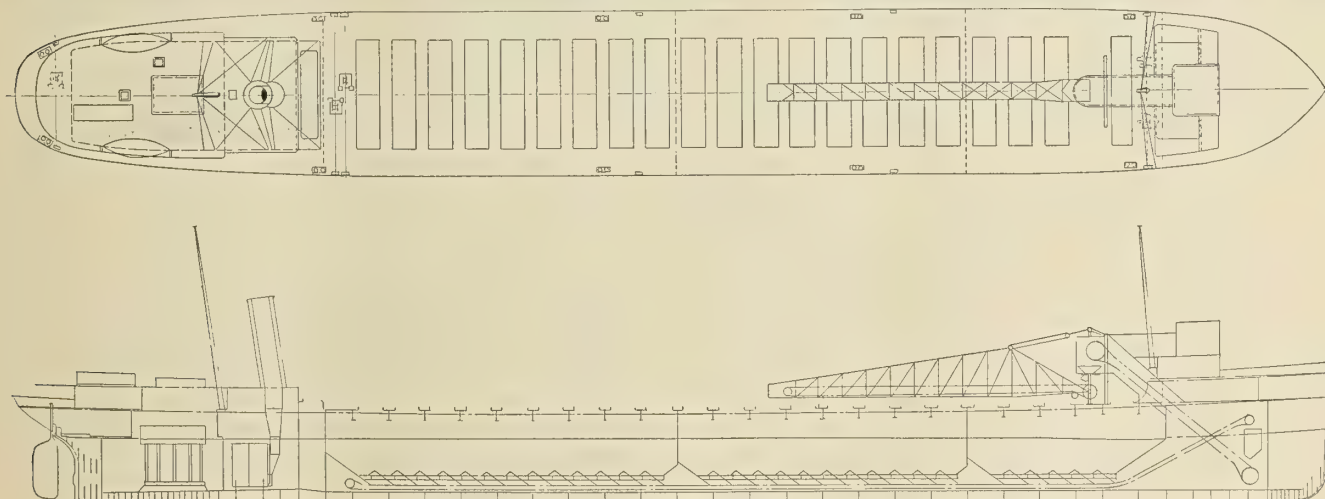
Deck Plan and Profile, Showing Arrangement of Conveyors on the *Huron
